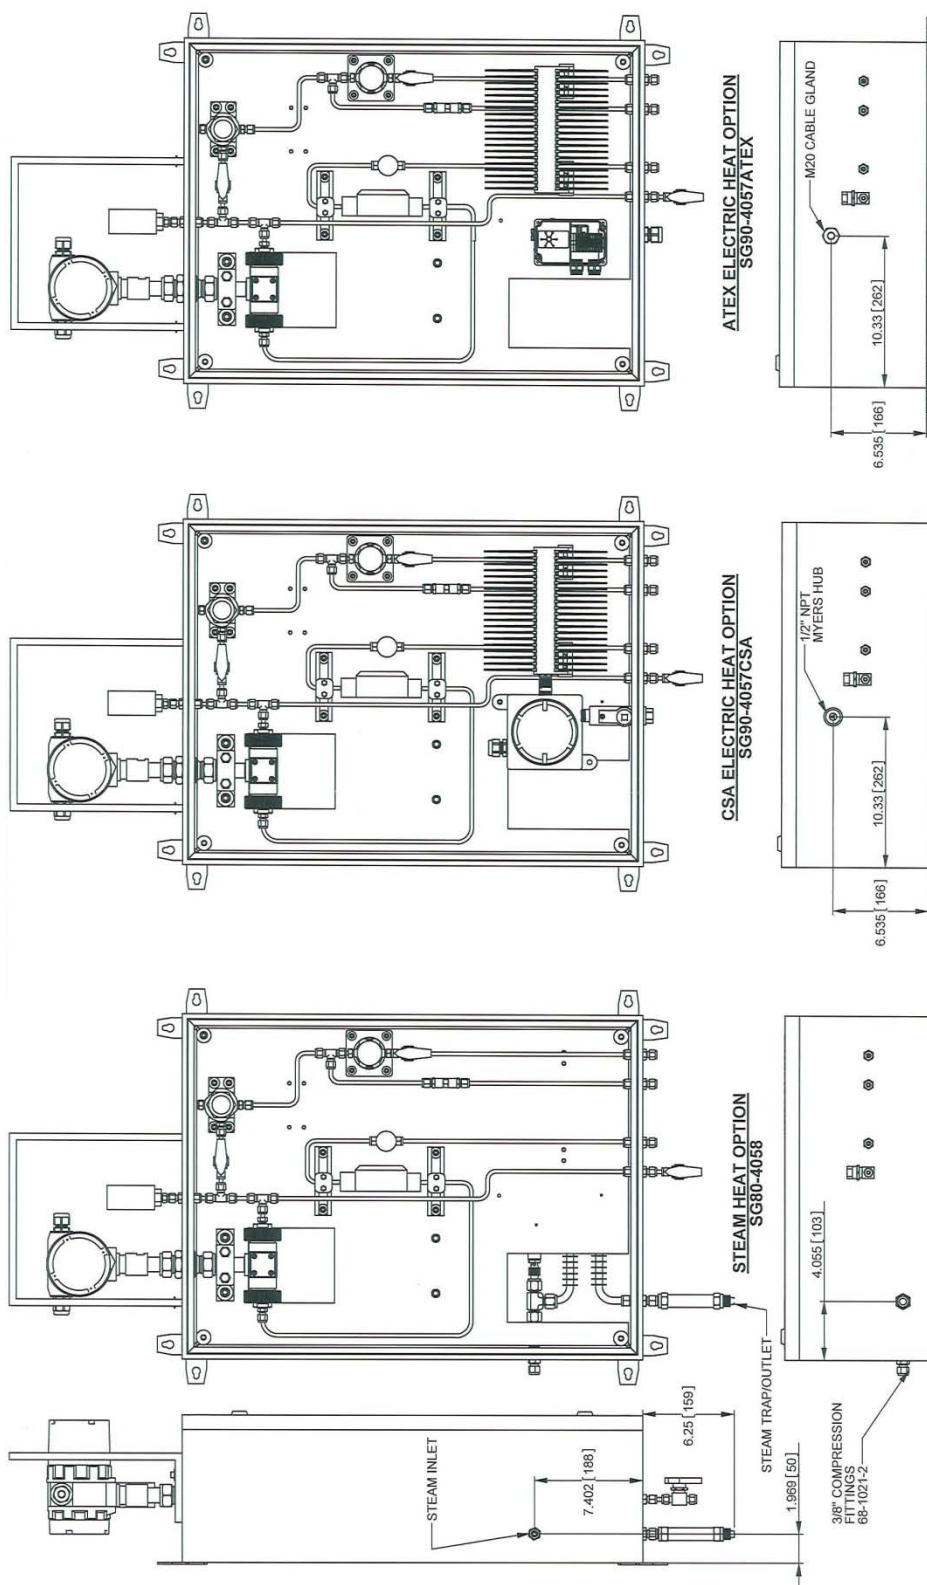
SG91-6003: General assembly drawing, HT wet gas system (sheet 3 of 3)
